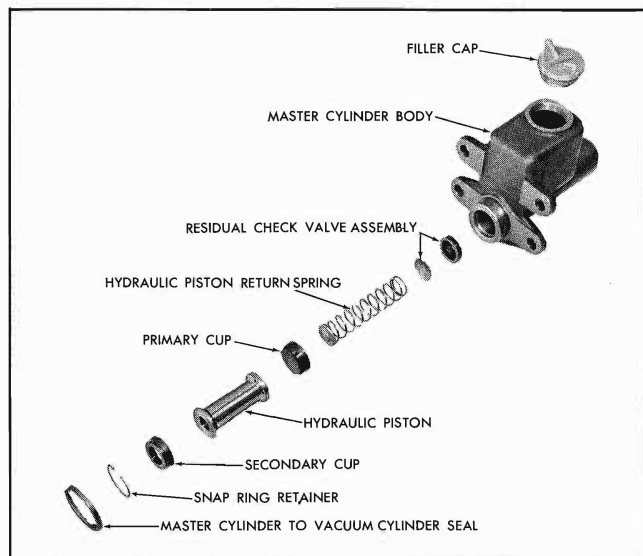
B-15 Master Cylinder Assembly—Exploded View
